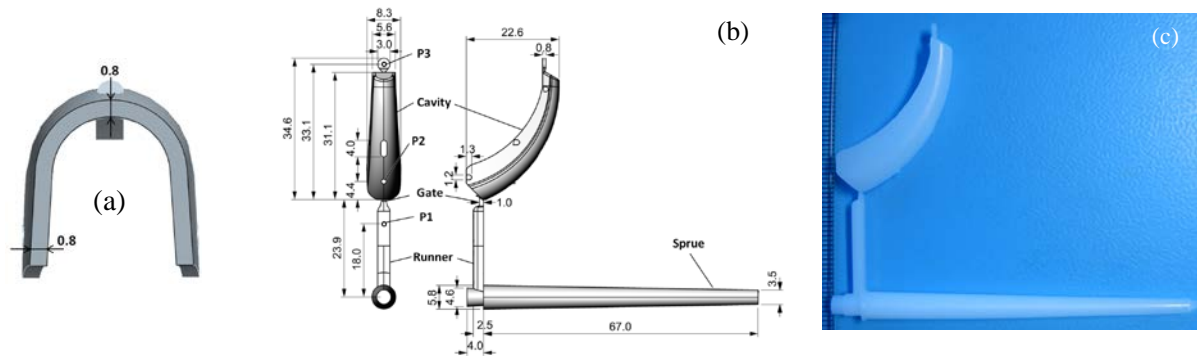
(a) Cross section of the part geometry. (b) Geometrical dimensions and sensor locations (P1, P2, and P3). (c) The injection molded hearing aid shell part. Material: polyoxymethylene Ticona Hostaform C 13021.
